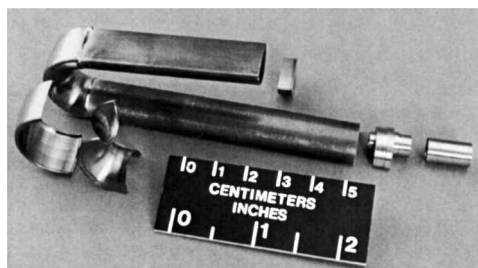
Photograph of the individual machined nose components and the completed nose assembly with the end plugs and fill tube cover.
